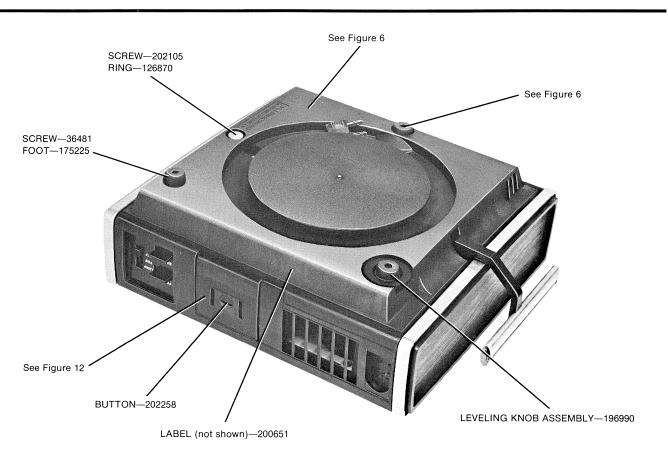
REMOTE CONTROL ASSEMBLY—171054
